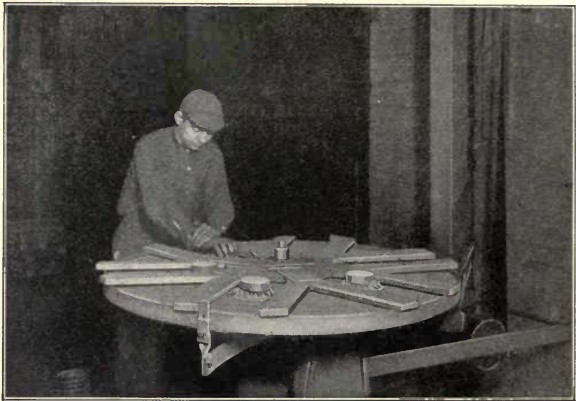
Grinding gas-burner parts on a horizontal disc-grinder.
